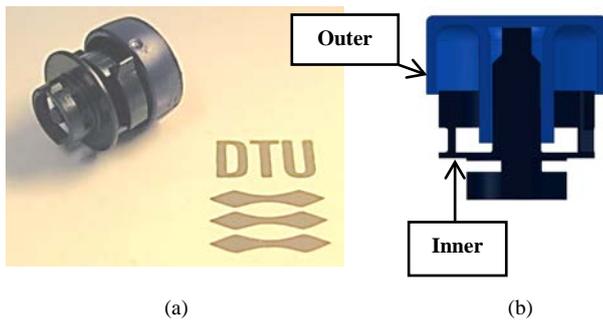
(a) the workpiece, (b) a 3D cross section representing the outer and inner component.
